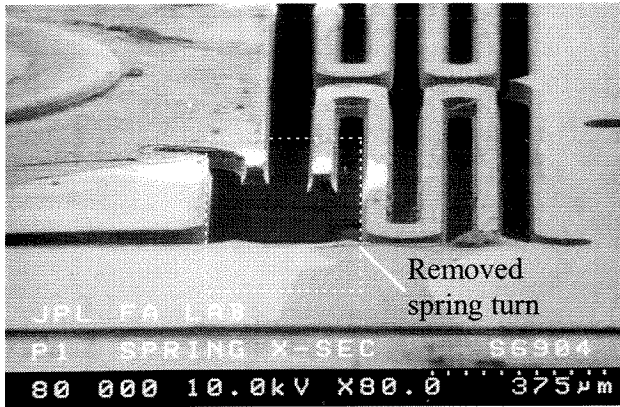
Silicon plate and spring with part of the spring ion milled off.
